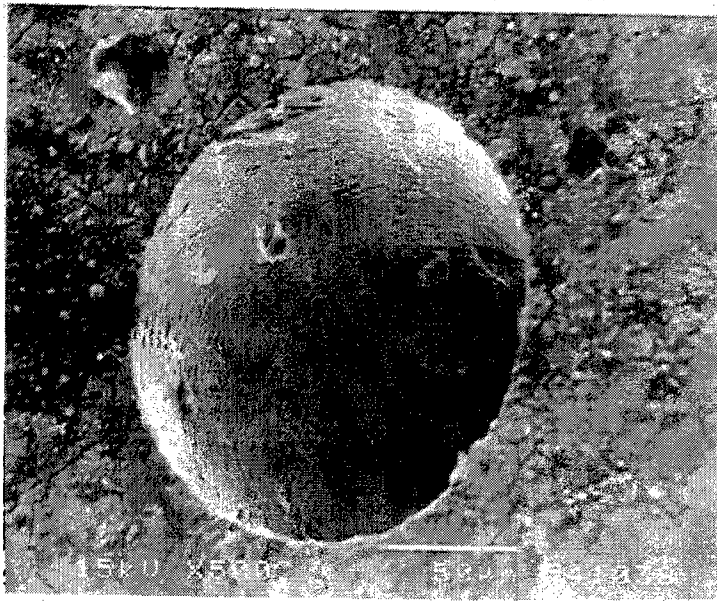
Example of a 150 μm diameter hole drilled through 1mm thick stainless steel by a Copper Laser.
